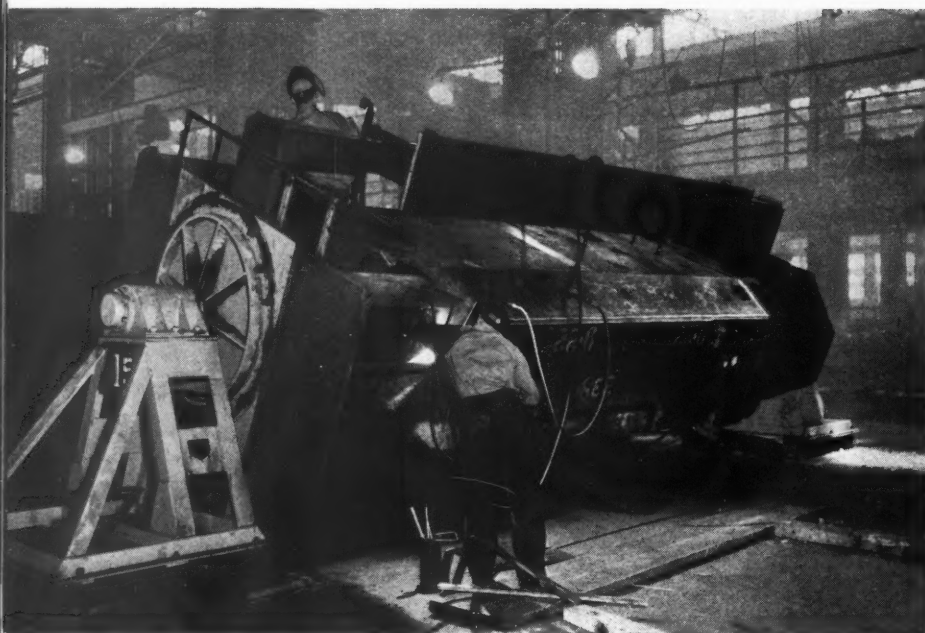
Finish-welding a hull on a motor-driven positioner, which enables the work to be rotated to the most convenient position for efficient welding
